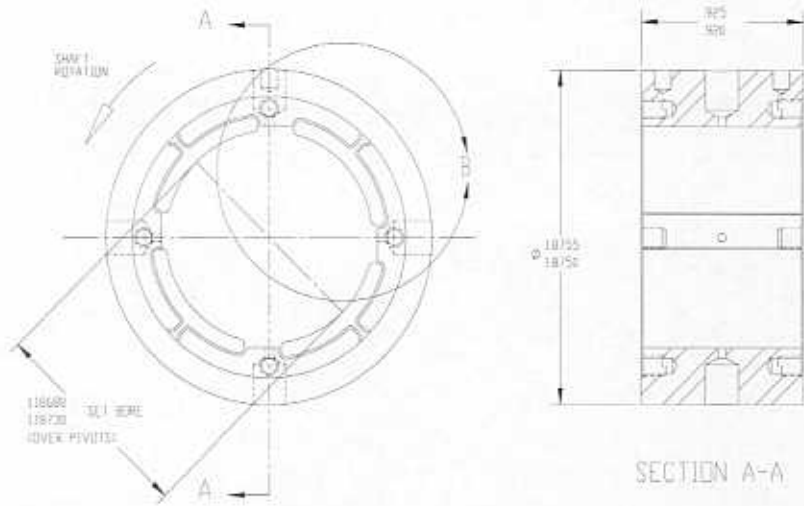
Dimensions of flexure pivot tilting pad journal bearing.
